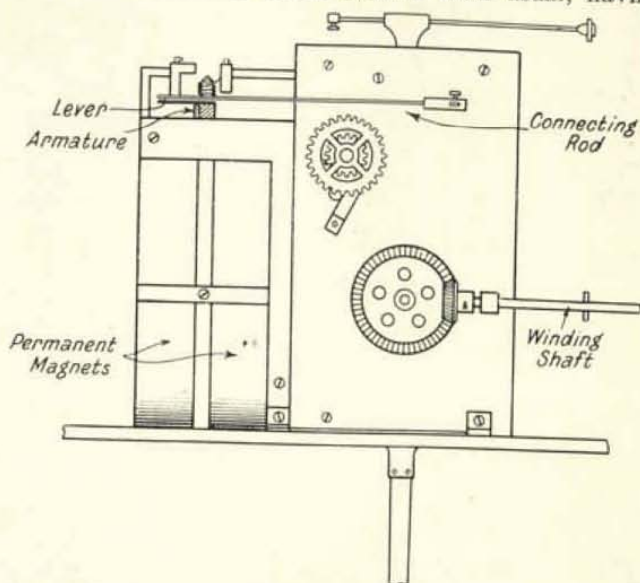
"MAGNETA" MASTER CLOCK MECHANISM, MAGNETO-OPERATED TYPE
